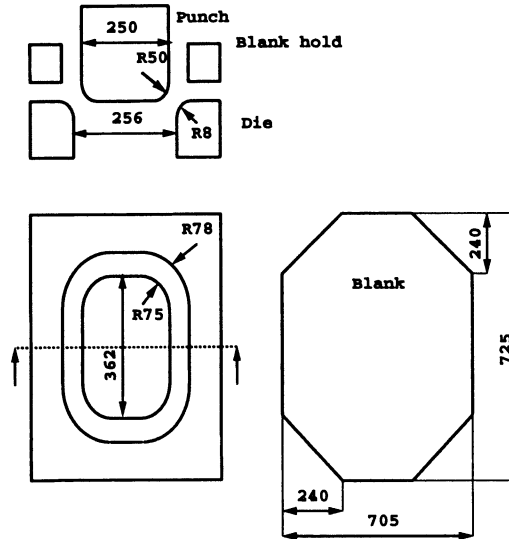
Geometry for tools and blank for deep drawing of a bar sink.
